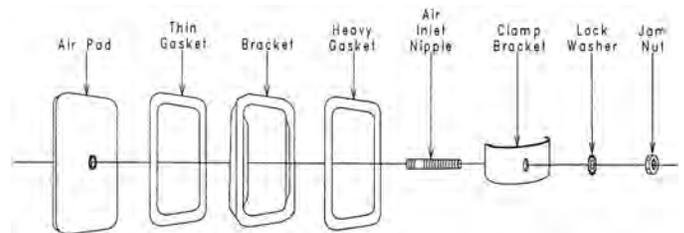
A - Overall assembly scheme for air pad with external mounting kit
